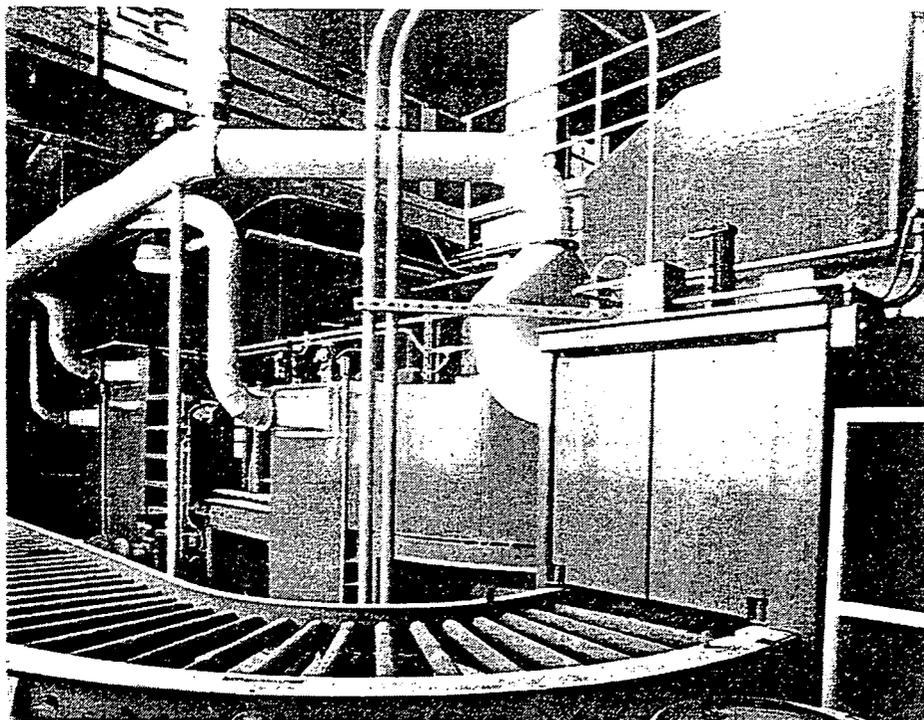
Building 1A - Drum Sampler and Drum Conveyor, NW Corner
